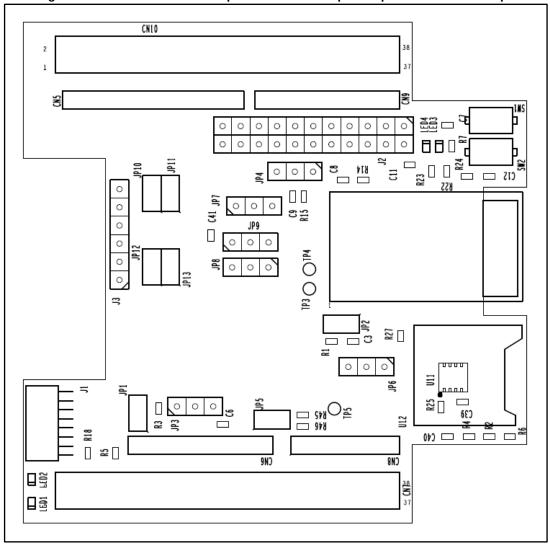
X-NUCLEO-IDW04A1 expansion board component placement details: bottom
